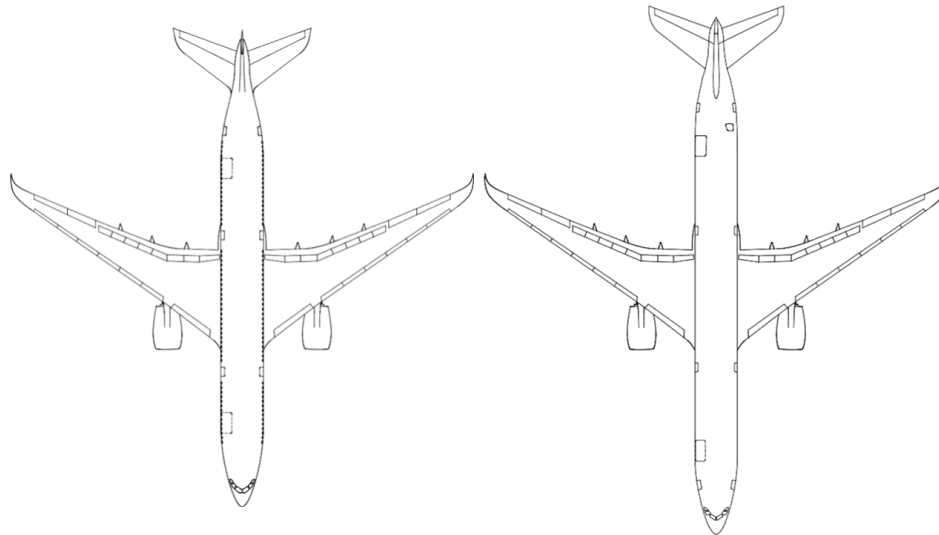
Planform view of the A350-900 (left) and -1000 (right), CAD drawings obtained from Airbus.
